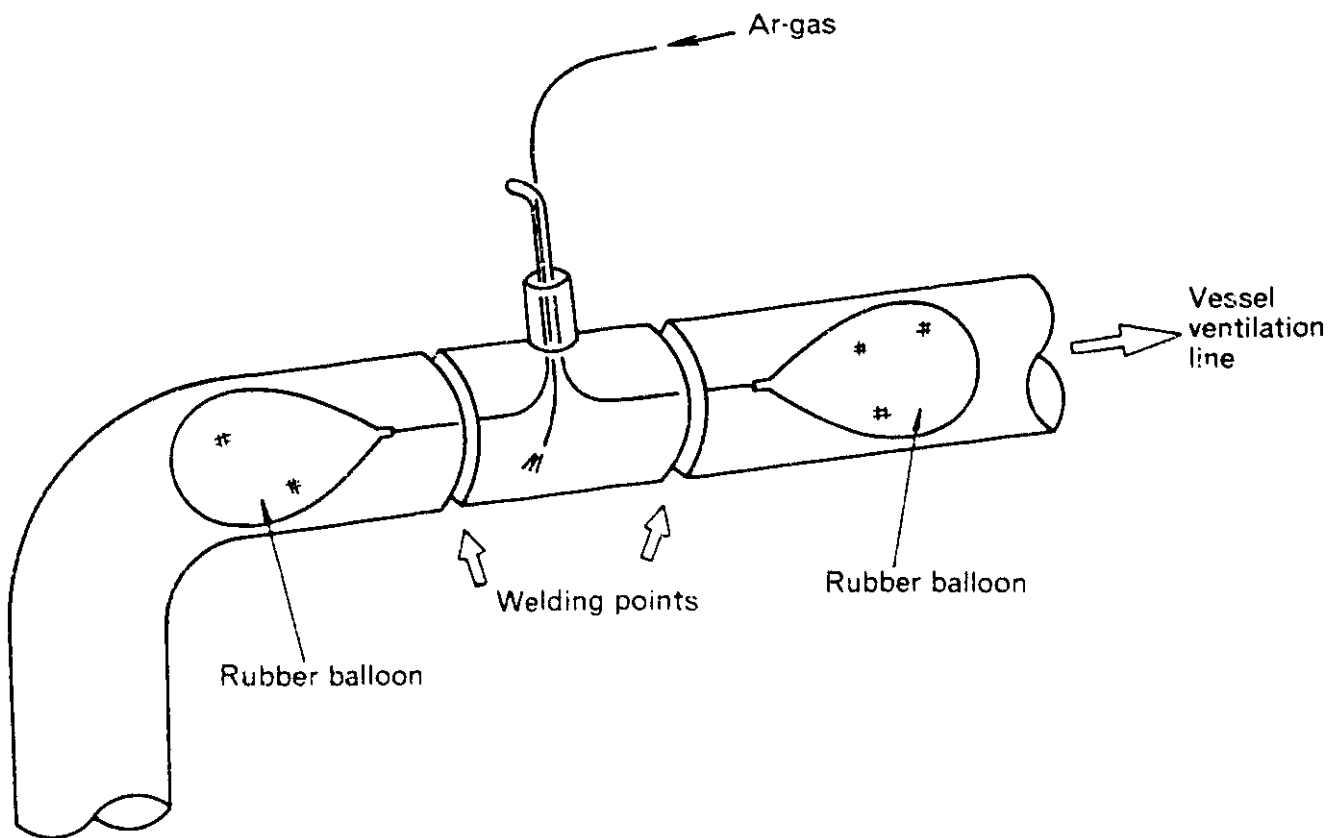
Ar-gas sealing method for pipings connected with the vessel ventilation line in welding work.
